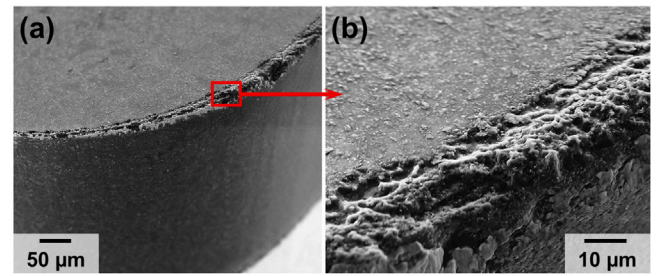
Images of the PCD(A) cutting edge when machining at 450 m/min, 0.0134 mm/z following $t_c = 3.74$ min. (a) Shows a low resolution BSE image highlighting the presence of adhered material (light) along the PCD cutting edge (dark). (b) Shows a higher resolution SE image at a location where adhered material has been removed from the tool highlighting pull-out of PCD grains from the rake face.
